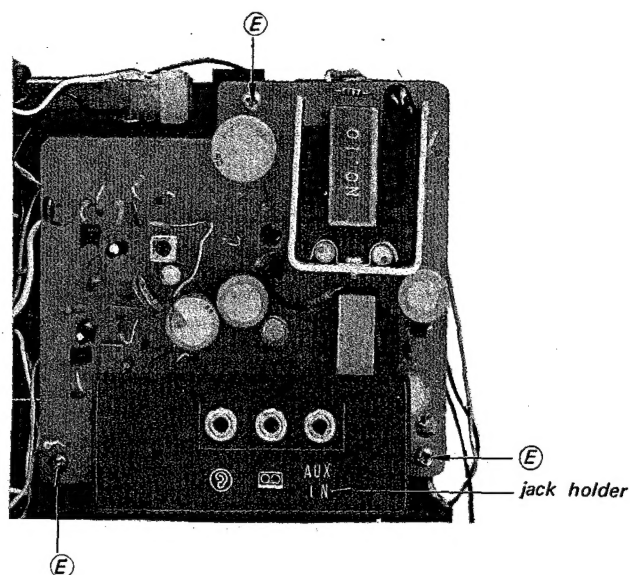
IF-AF circuit board removal, steps 2 and 3
